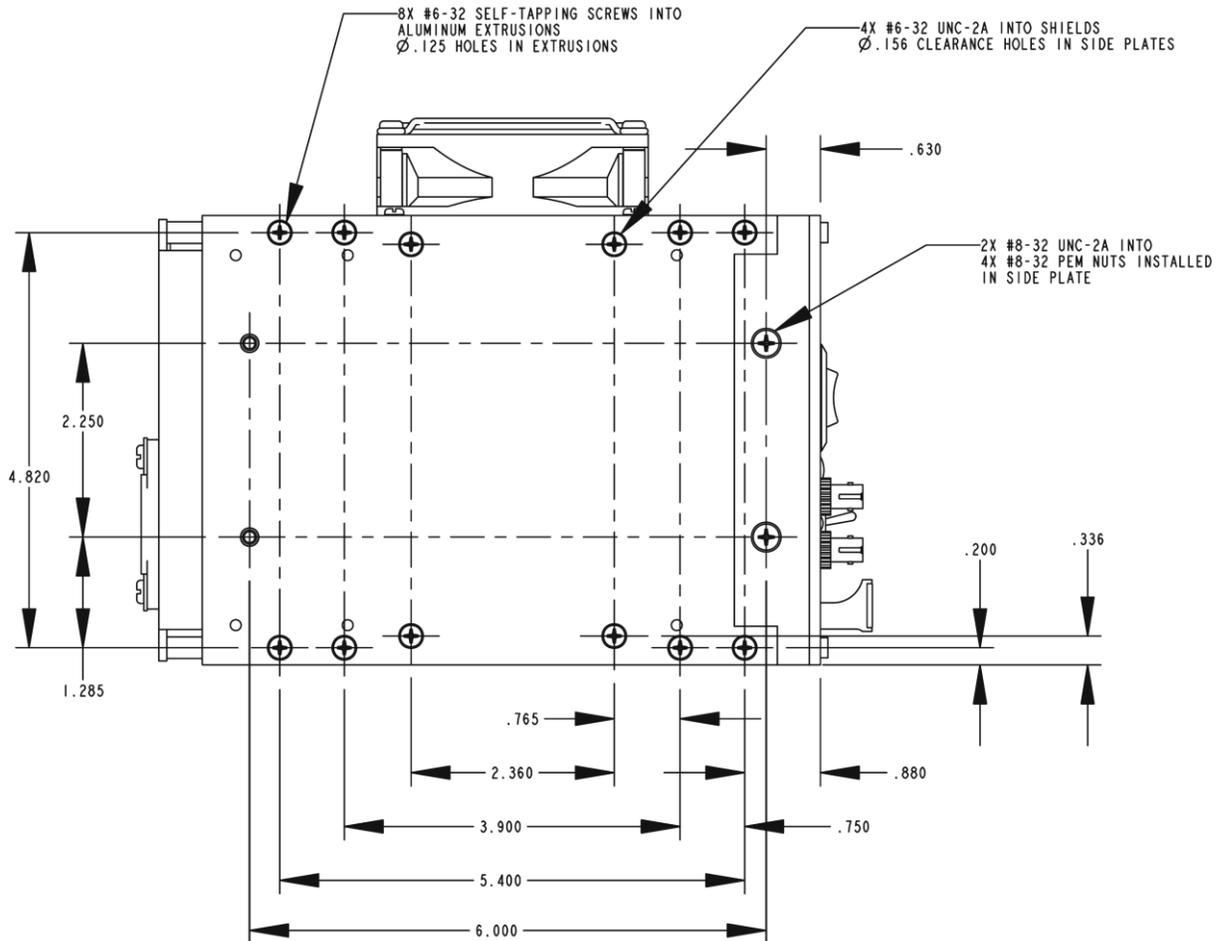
Side View of Typical Model 903 Console Card Cage.
